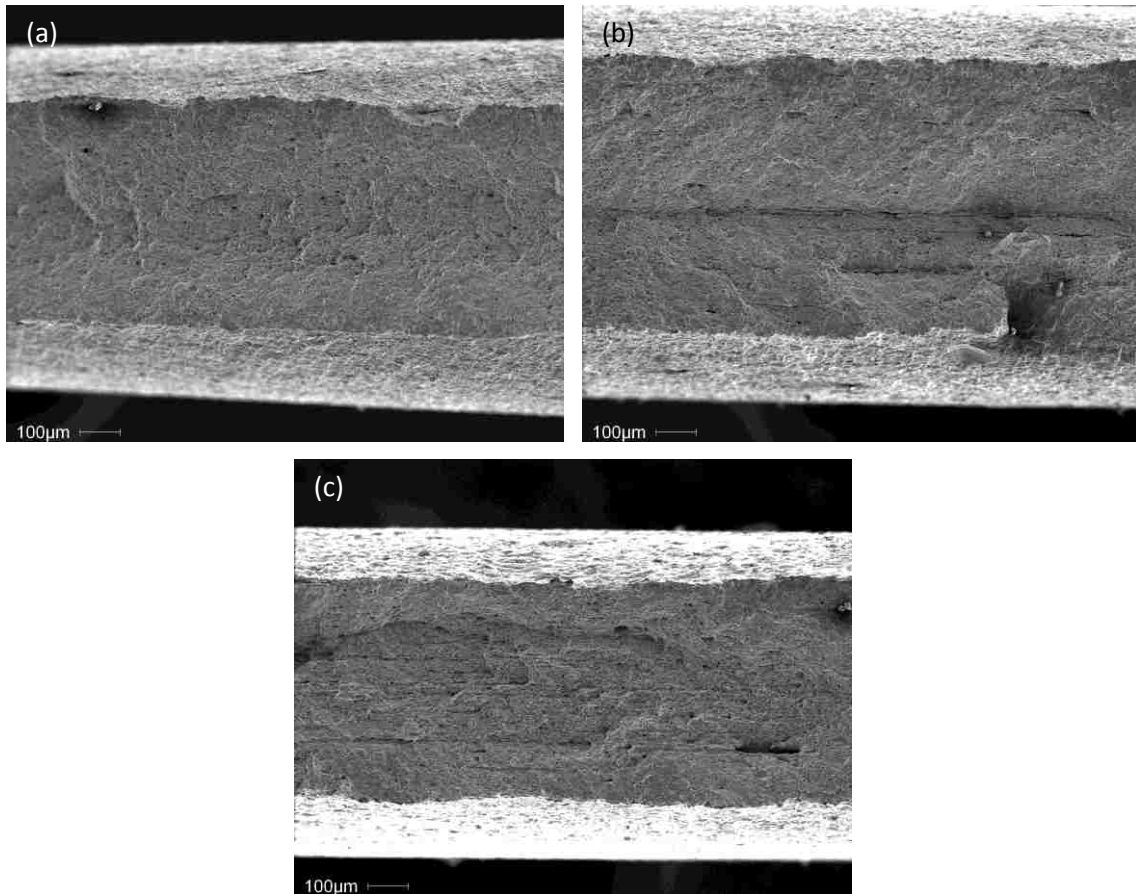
Tensile test fracture surfaces of (a) steel 1, (b) steel 2, and (c) steel 3
